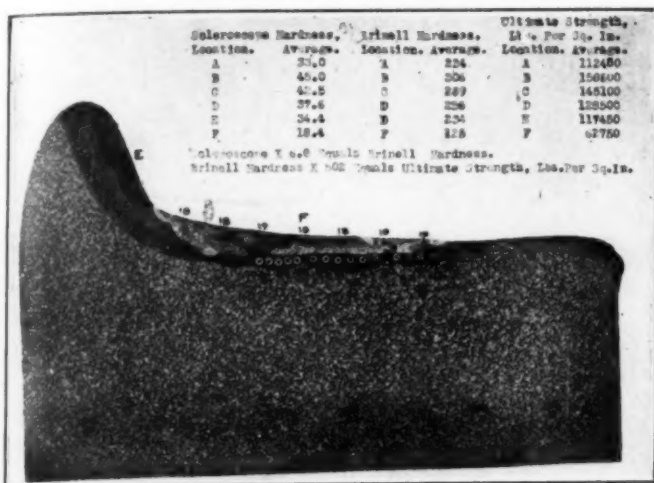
Transverse Section Through a Locomotive Tire with Flat Spot Welded By the Electric Process
